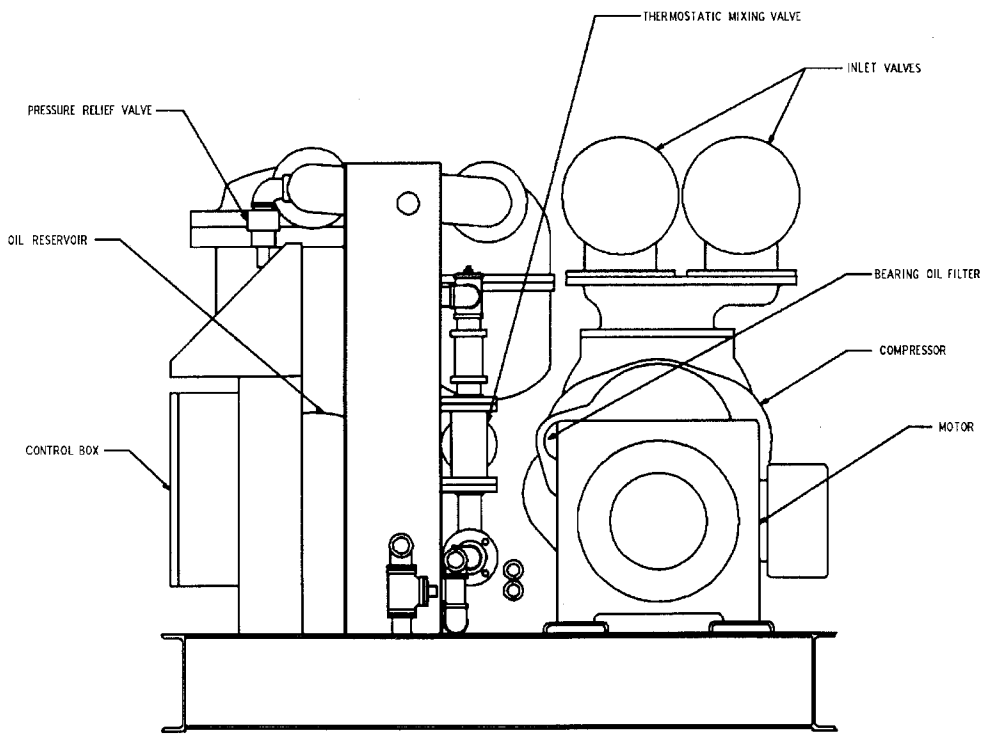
VIEW OF WATER COOLED UNIT WITH AFTERCOOLER (LESS ENCLOSURE) MOTOR END
